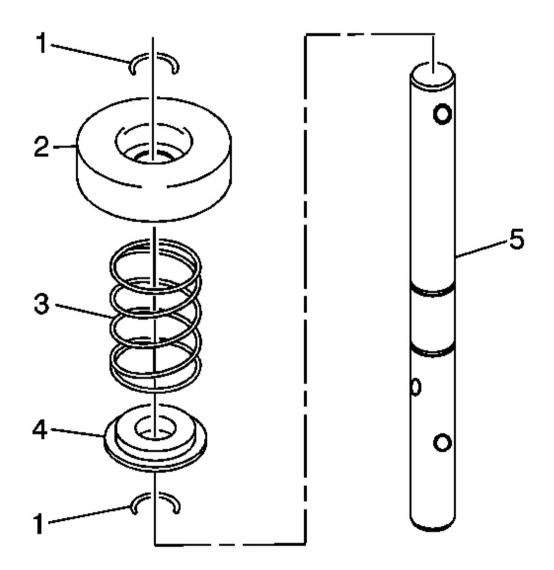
Inner/Outer Spring Seat, Retainers & Shift Rod Courtesy of GENERAL MOTORS CORP.
